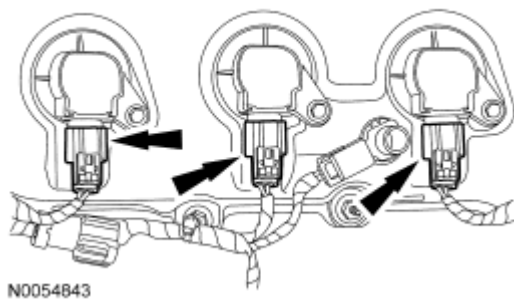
Locating RH Coil-On-Plug Electrical Connectors
